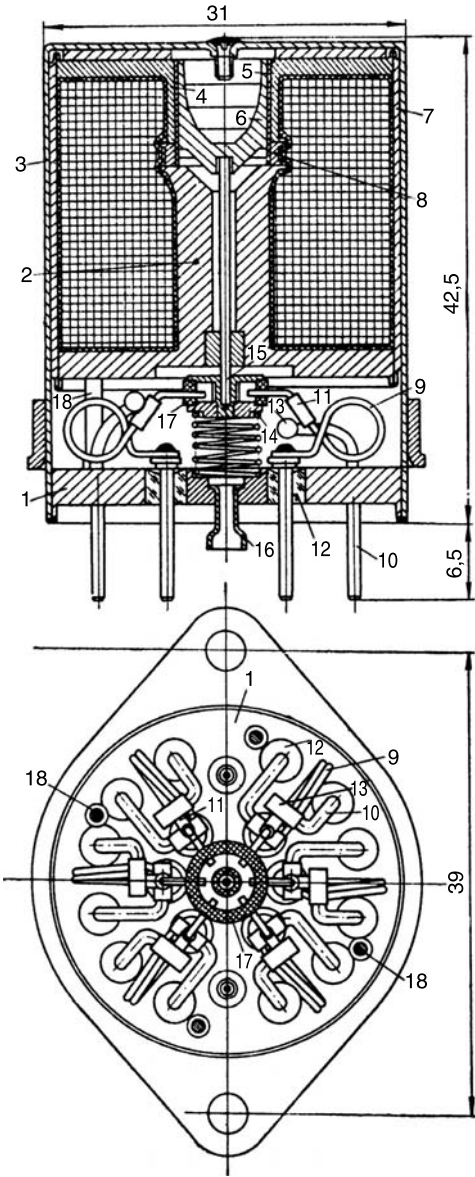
Miniature Mark-II-type relay produced by “Electro Tech Co.” and an exact replica RES-39-type relay (Russia) with a retractable solenoid-type armature. 1 — heel piece; 2 — core; 3 — steel case; 4 — steel cup; 5 — guide brass tube; 6 — hollow retractable armature with a glass-shaped conical stopper; 7 — iron body; 8 — nonmagnetic bushing; 9 — movable contact springs; 10 — small pin; 12 — glass insulator; 13 — stationary contacts; 14 — cylindrical spiral spring; 15 — rod; 16 — union through which the relay is filled with dry air and sealed; 17 — pusher; 18 — steel posts with the magnetic system fixed.
